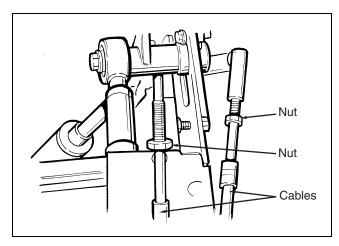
E-4. Screw Hex Nut onto Cable End as Shown
